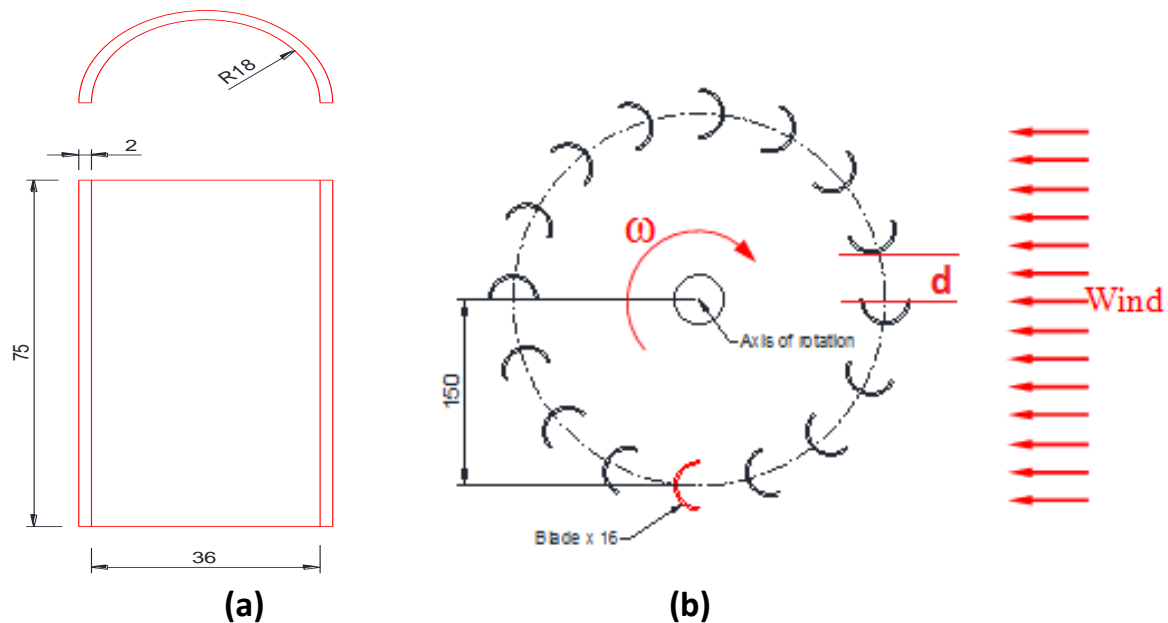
(a) Dimensions (mm) of the semicircle shaped wind turbine blade; (b) Top view of 16-bladed wind turbine rotor.
